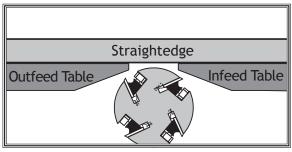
Infeed and outfeed tables set evenly (knife-style cutterhead shown).
